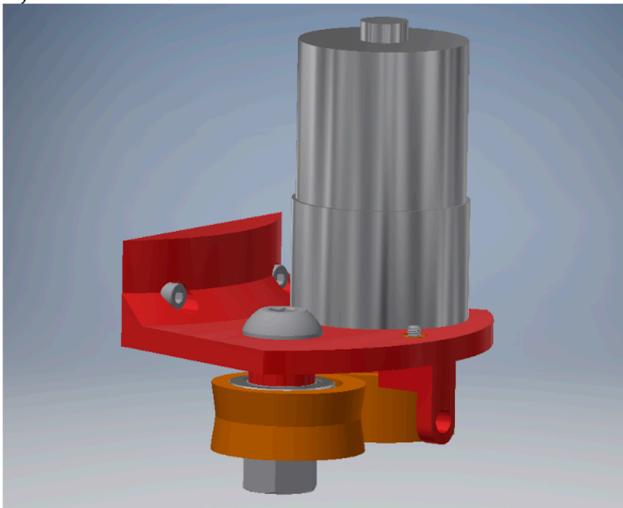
Rendering of the assembled filament driver with motor of the open-source 3-D printable pelletizer chopper.
